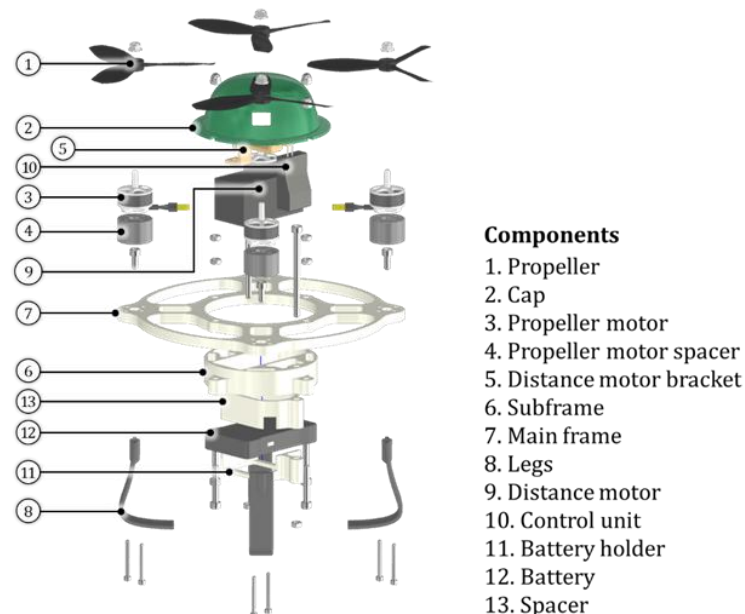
Exploded view of the drone illustrating the arrangement and numbering of the individual parts.
